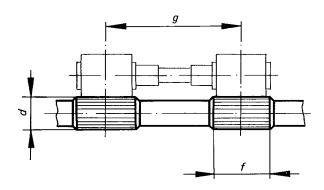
Bottom fluted rollers for spinning frames and roving frames
